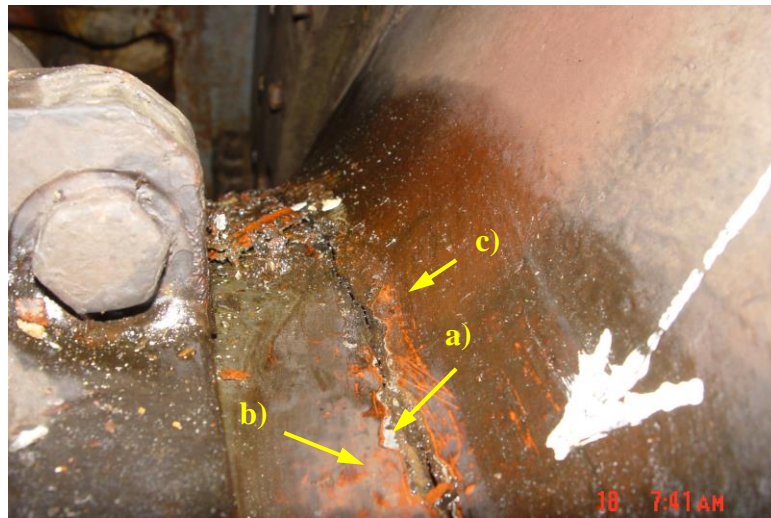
Close view of the transient flange radius after detecting the crack
